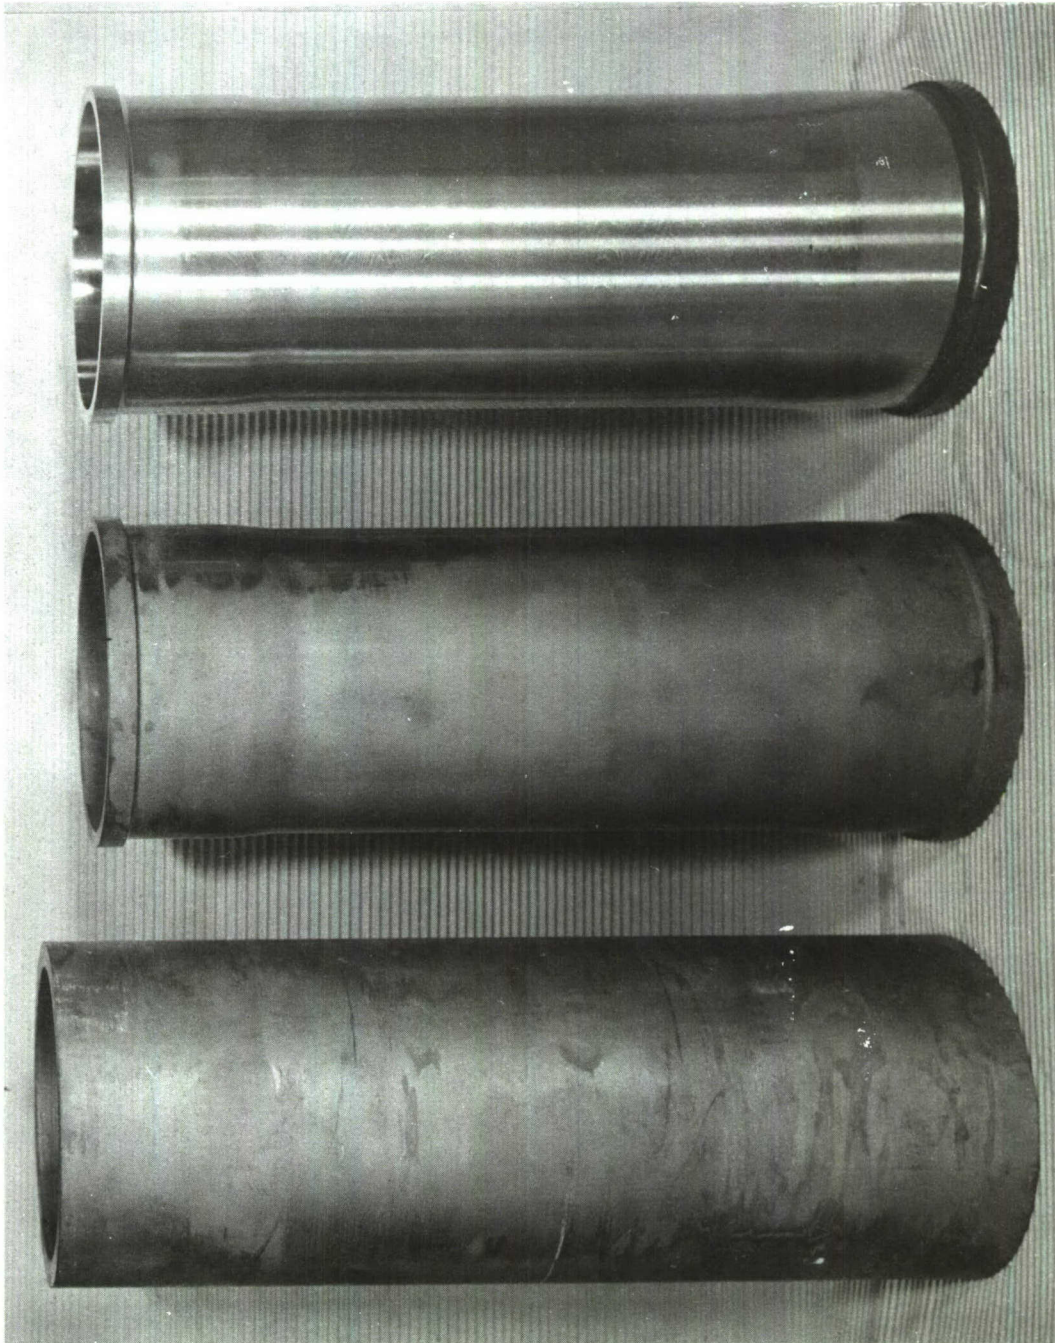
Three Stages of Cylinder Preparation Ring Forging, Machined and Heat Treated Cylinder and Finally Polished Cylinder.
